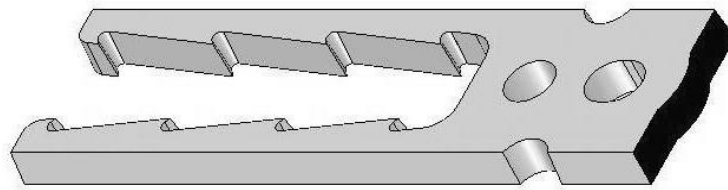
Typical plate style Edgelift anchor used in thin concrete wall panels
